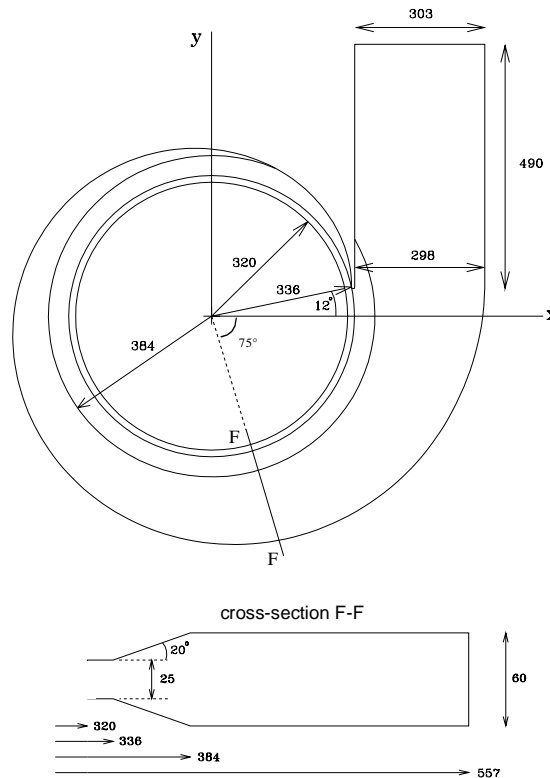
Spiral volute (plane view and cross-section) All dimensions in mm.
